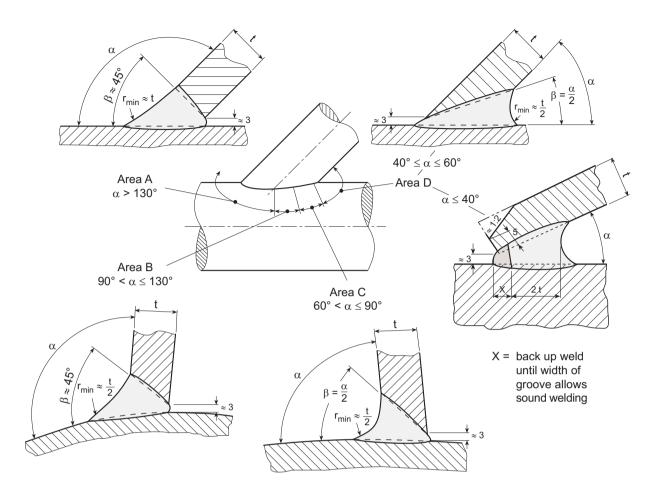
Typical tubular weld connections without back welding
